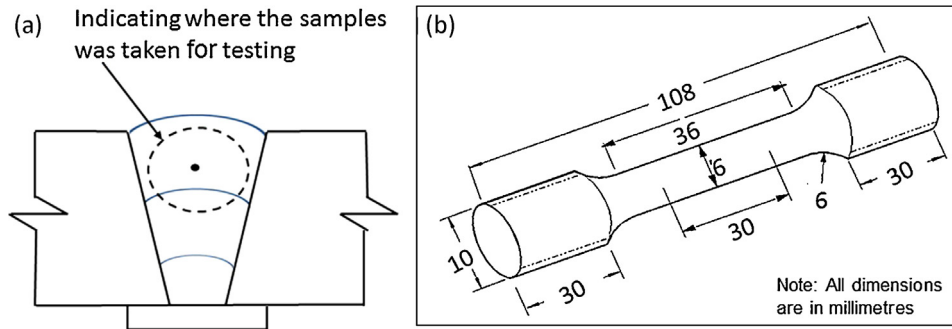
Tensile test (a) All weld metal in longitudinal direction (b) dimension of tested samples.
